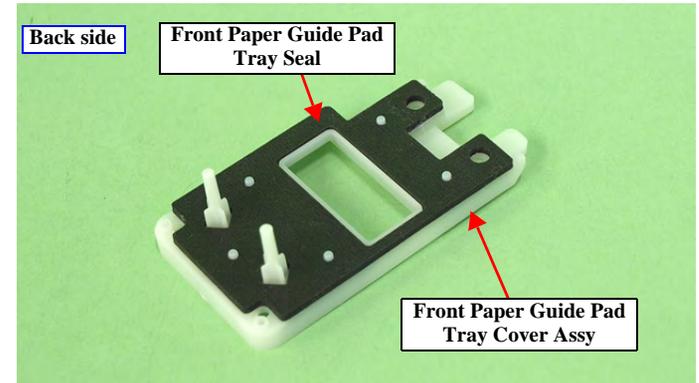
Handling for Front Paper Guide Pad Tray Seal
